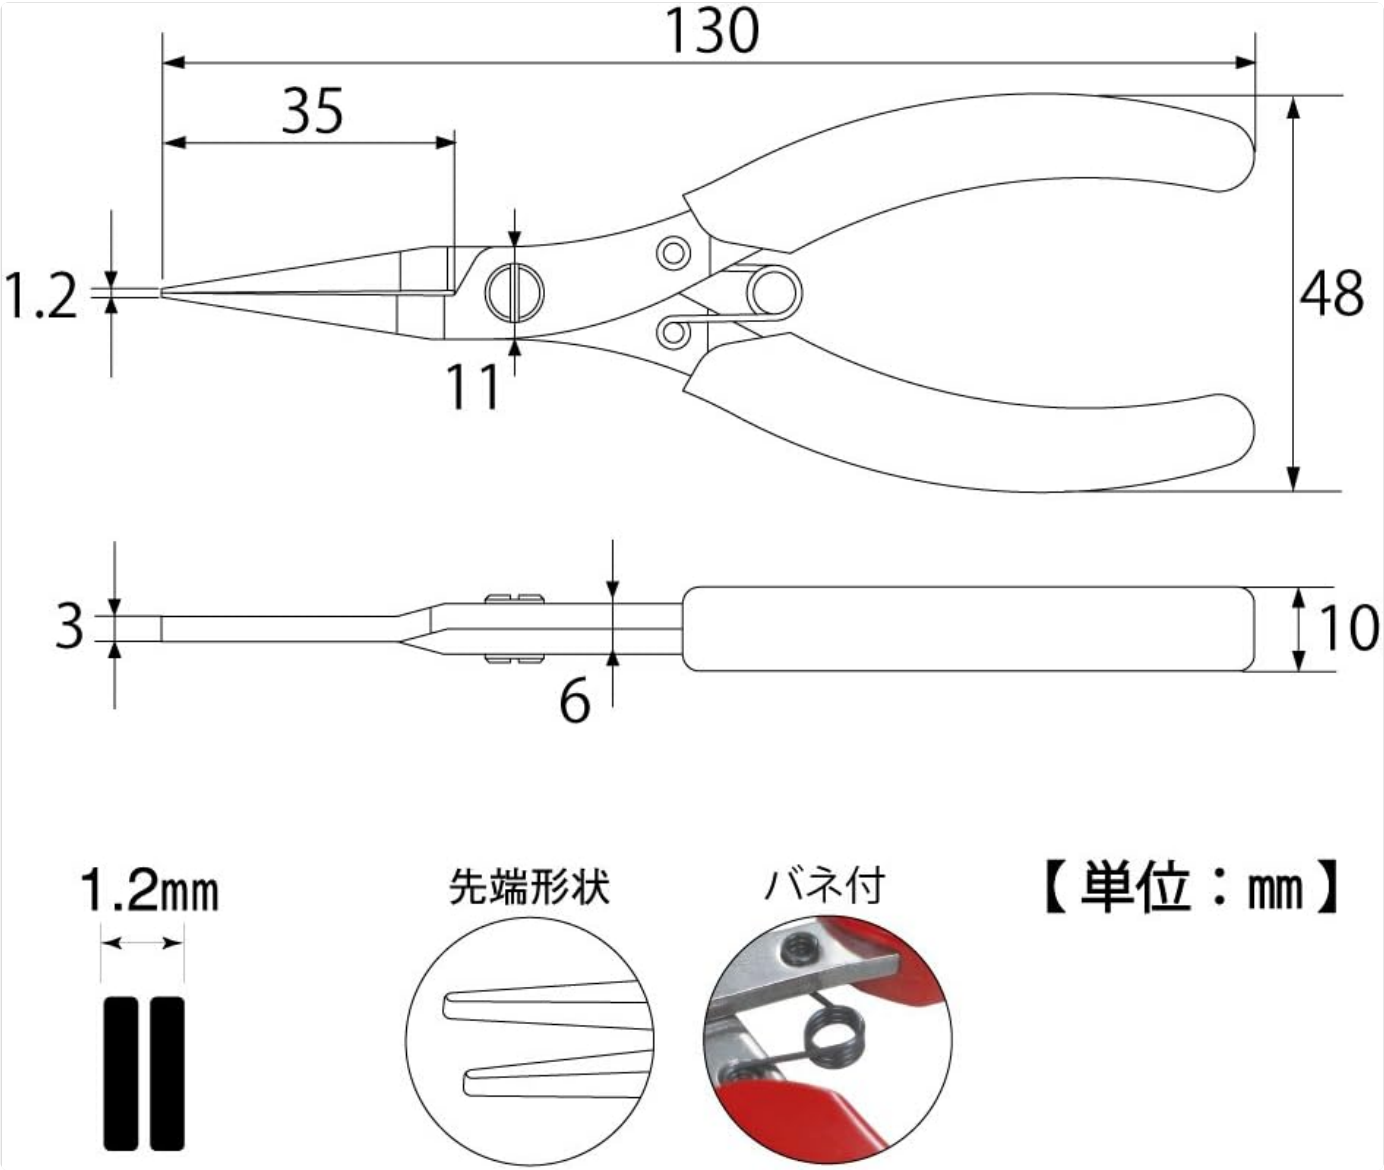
Technical drawing showing the dimensions of the FN-100 pliers in millimeters, including overall length, jaw length, and tip thickness.
